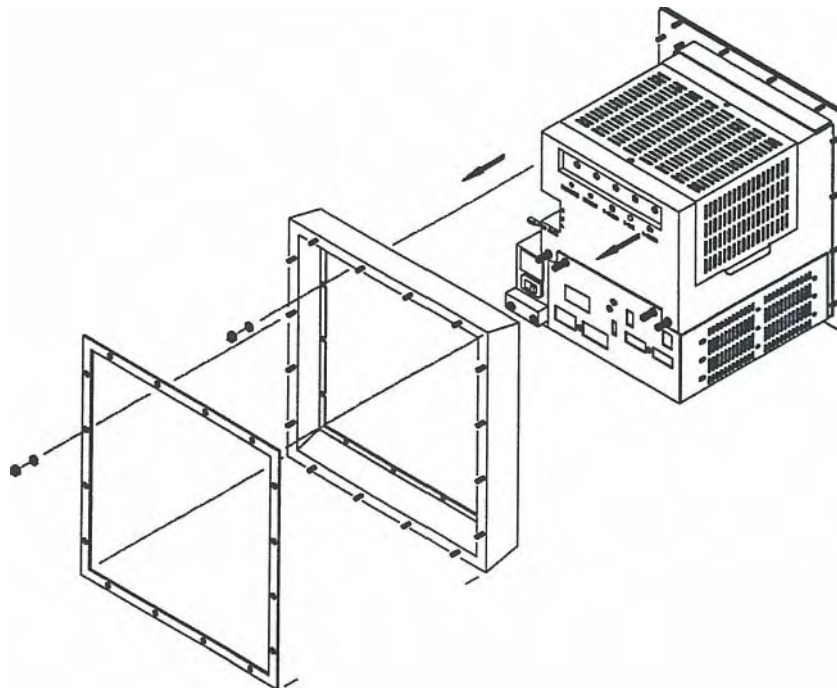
PanelMate Series 2000 Color (Model 2700) Mounting Collar Assembly
